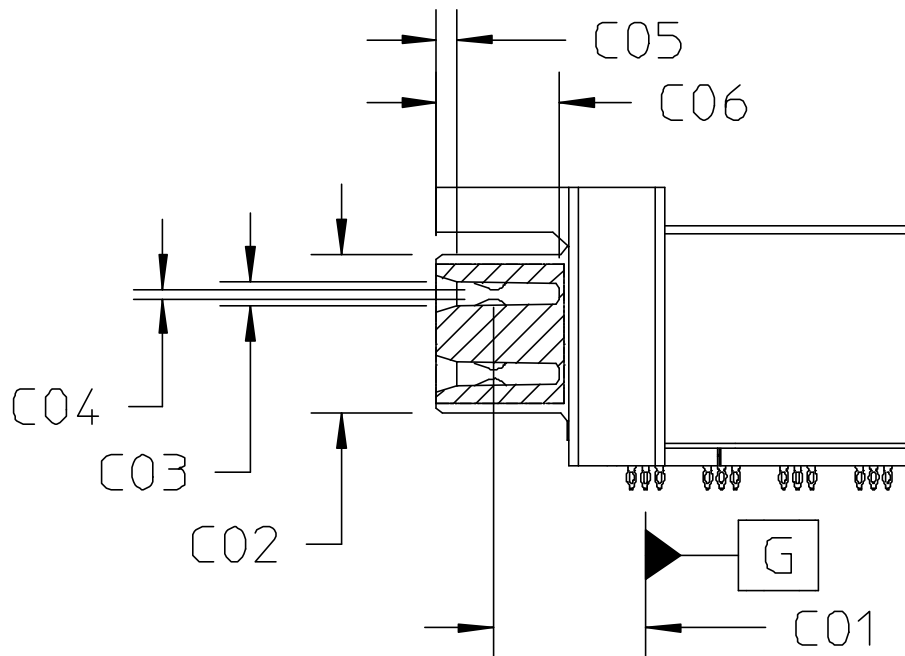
UNSHIELDED FIXED (RECEPTACLE) RIGHT ANGLE INTEGRATED HD CONNECTOR CONTACT LOCATION DIMENSIONS
